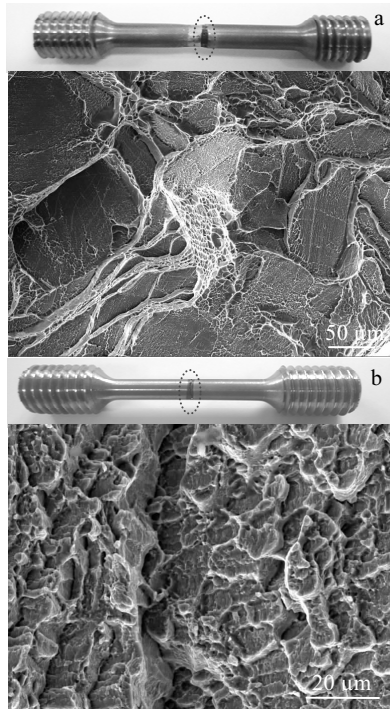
Tensile fractographs of dual-alloy weldments in different conditions tested at room temperature: (a) welding and (b) deformation treatment
